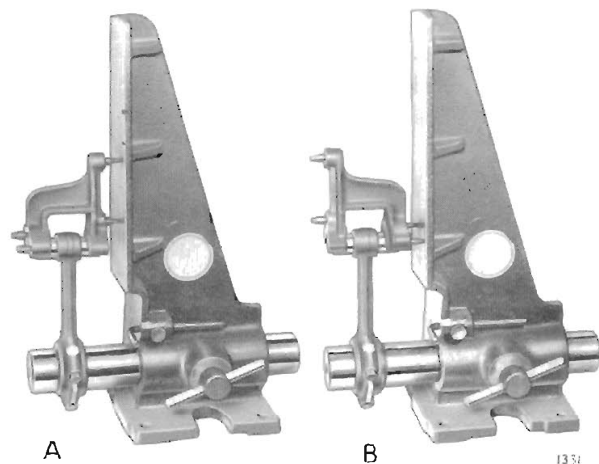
Checking connecting rod for bend and twist — using tool No. S336-3
